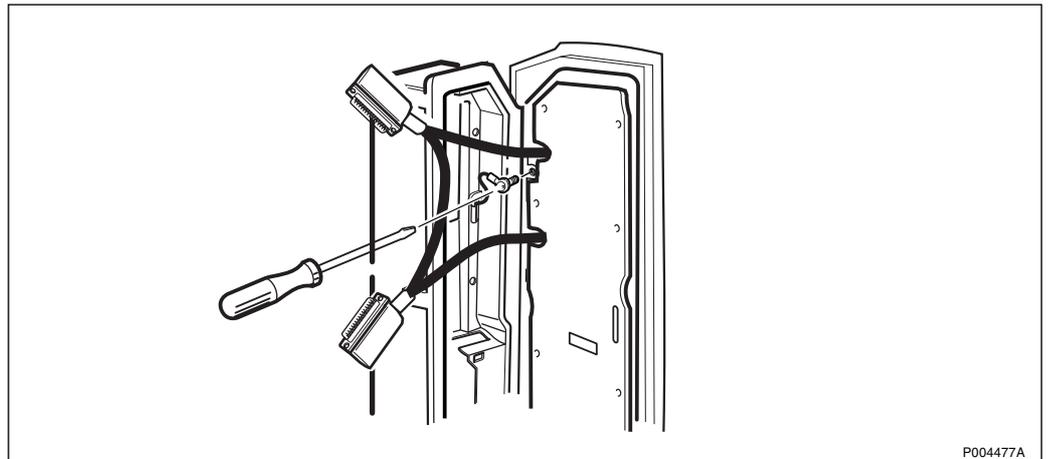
Mounting the earth cable, Installation Box Door with HDSL
